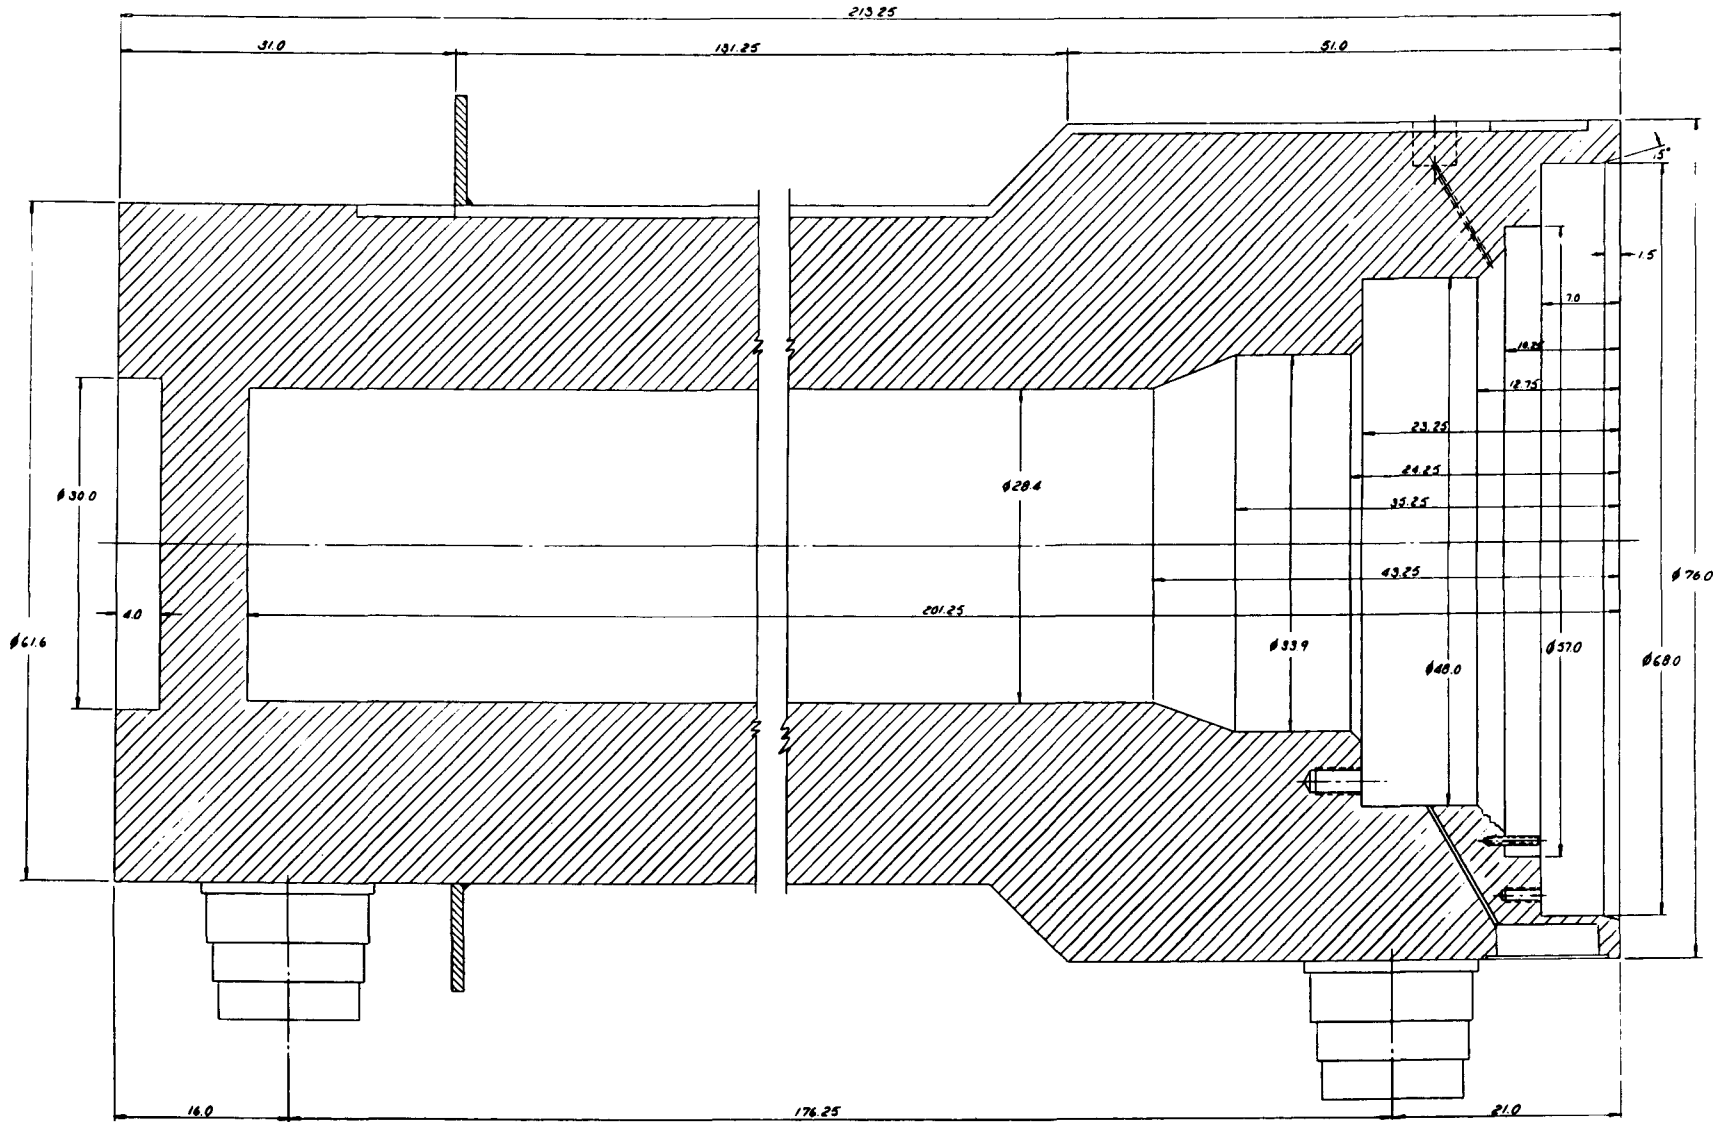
Cask Body Dimensions for Three-Level Containment Alternate Design
